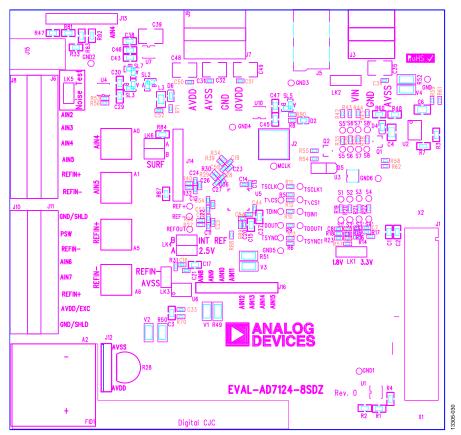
Top Printed Circuit Board (PCB) Silkscreen
